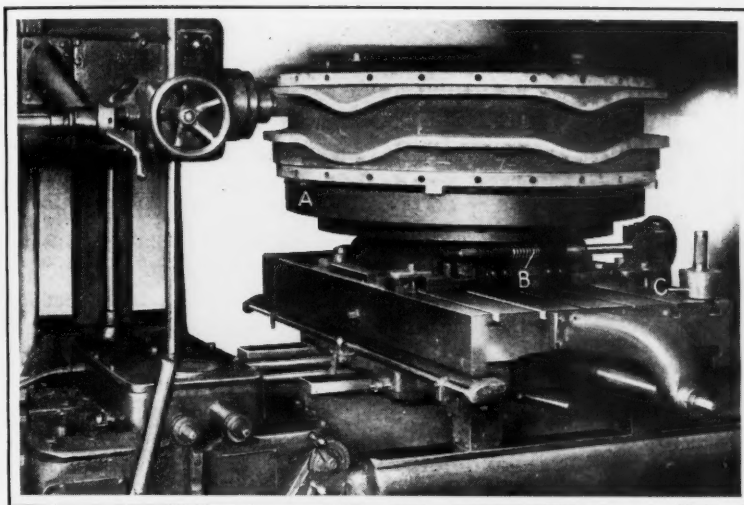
Equipment Employed in Machining a Large Drum Cam Having a Tapered Path
